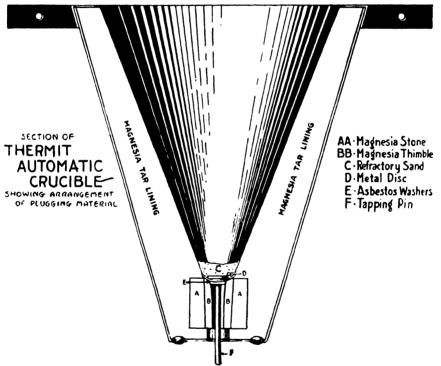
A thermit weld crucible: AA. Magnesia stone, BB. Magnesia thimble, C. Refractory sand, D. Metal disc, E. Asbestos washers, F. Tapping pin (Courtesy of: Metal and Thermit Corporation)
